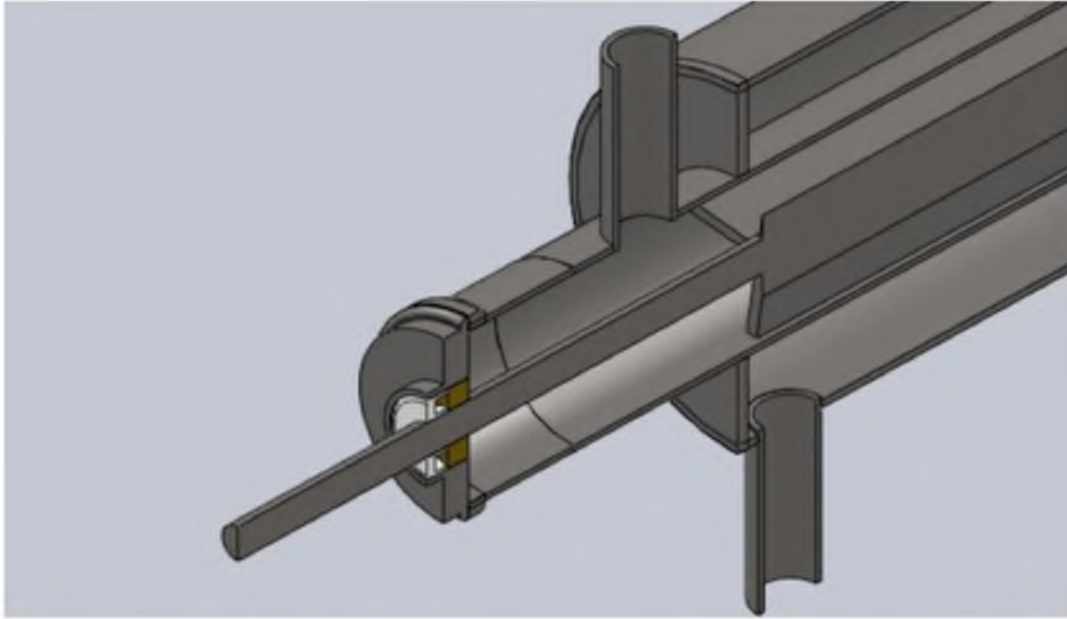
Close-up view of SCEv3 rotating shaft bearing assembly. Bearing was made using molded steel plate fitted with a low pressure, moderate speed seal as described earlier.
